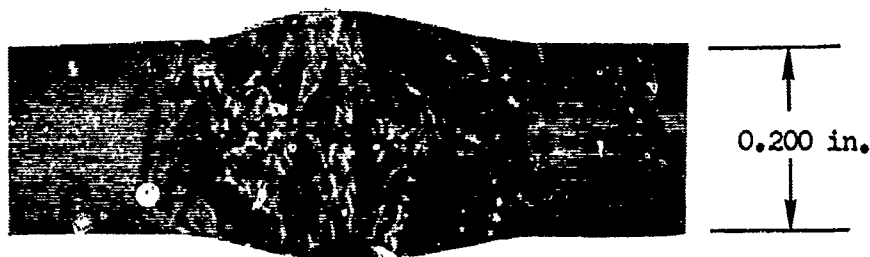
Photomacrograph (5X) of Ti-6Al-4V Welded Joint Using Ti-6Al-4V Filler Wire and With Weld Passes Made on Both Sides of Panel
